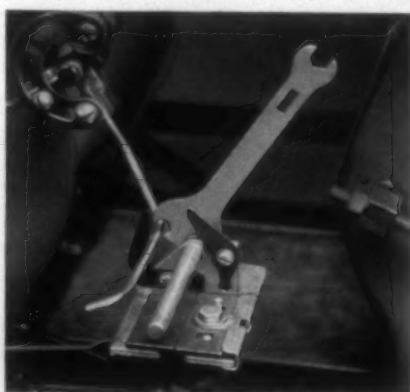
Illustrating use of Multi-Purpose Wrench on Precision Cleaner.
